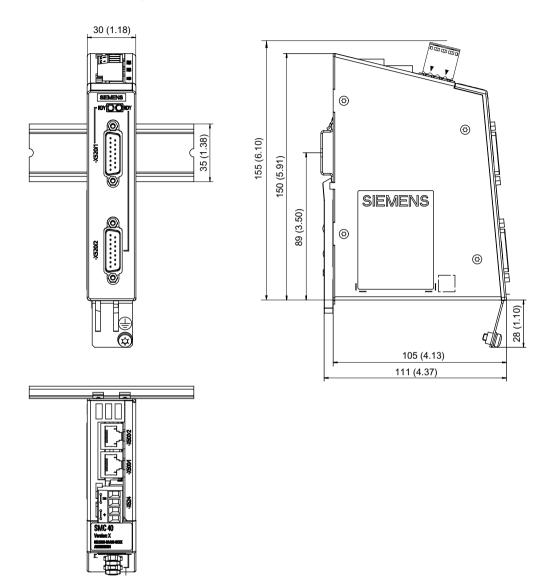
Dimension drawing of the Sensor Module Cabinet SMC40, all data in mm and (inches)
